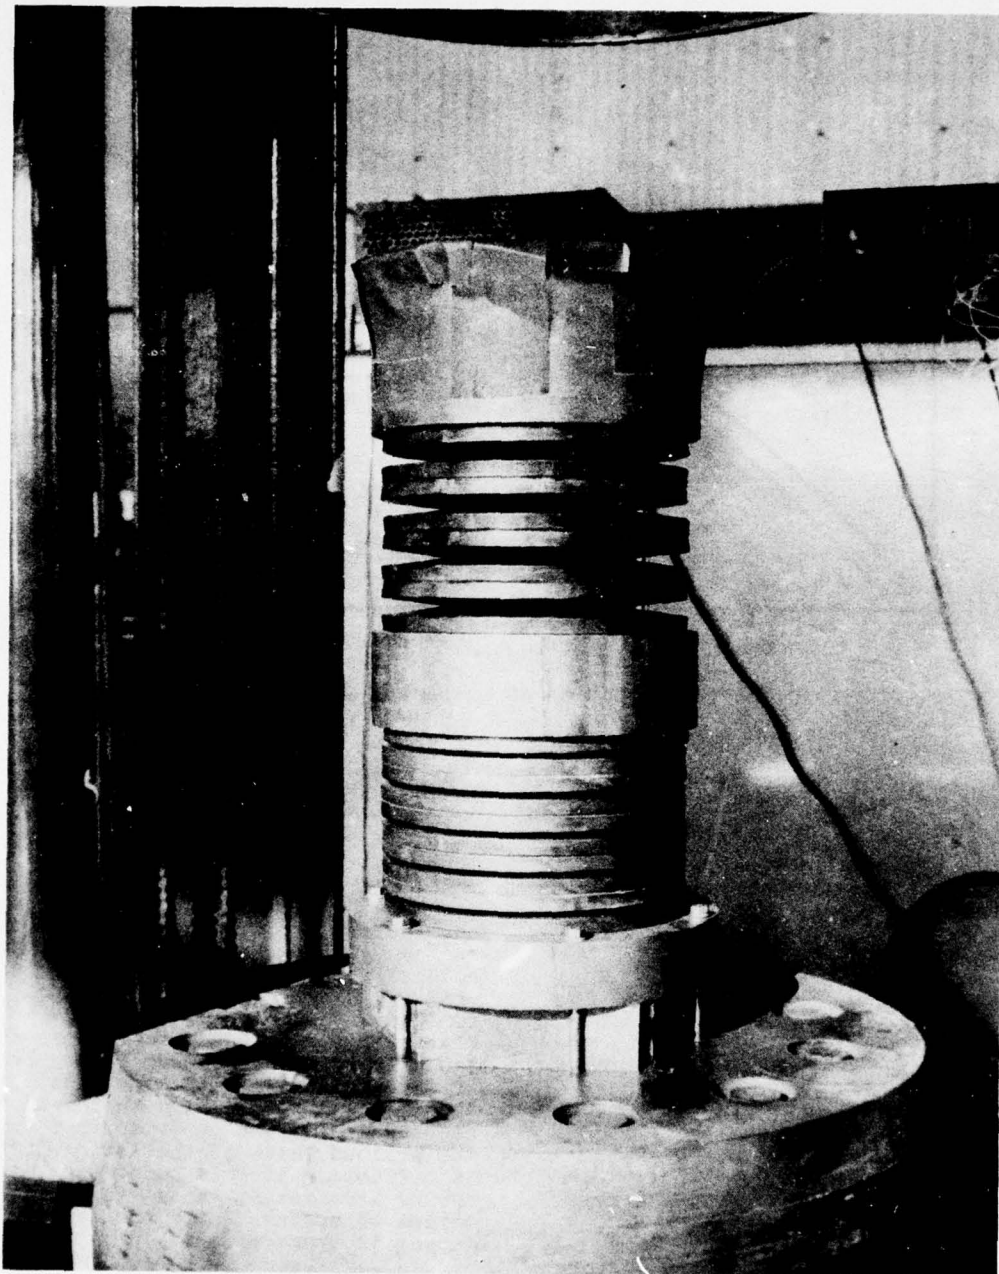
Assembly and Guide Mechanism Mounted on Dual Mode Shock Machine.
